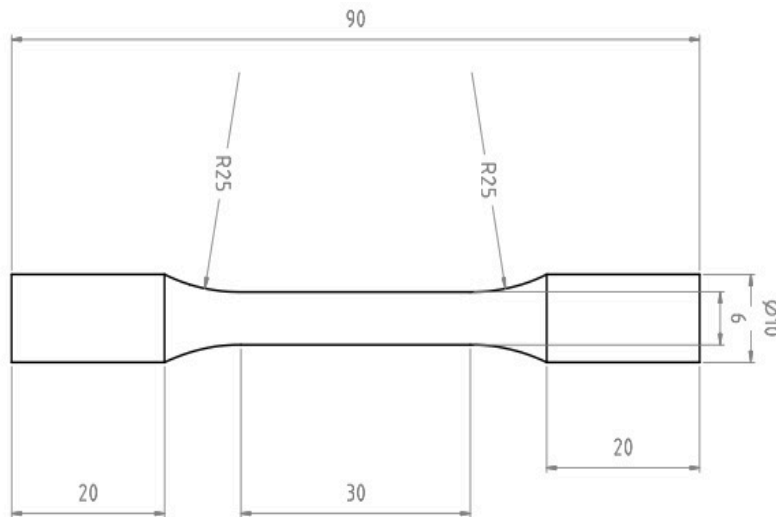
Schematic showing the geometry of the tensile test specimens, Specimen dimensions are given in millimeters.
